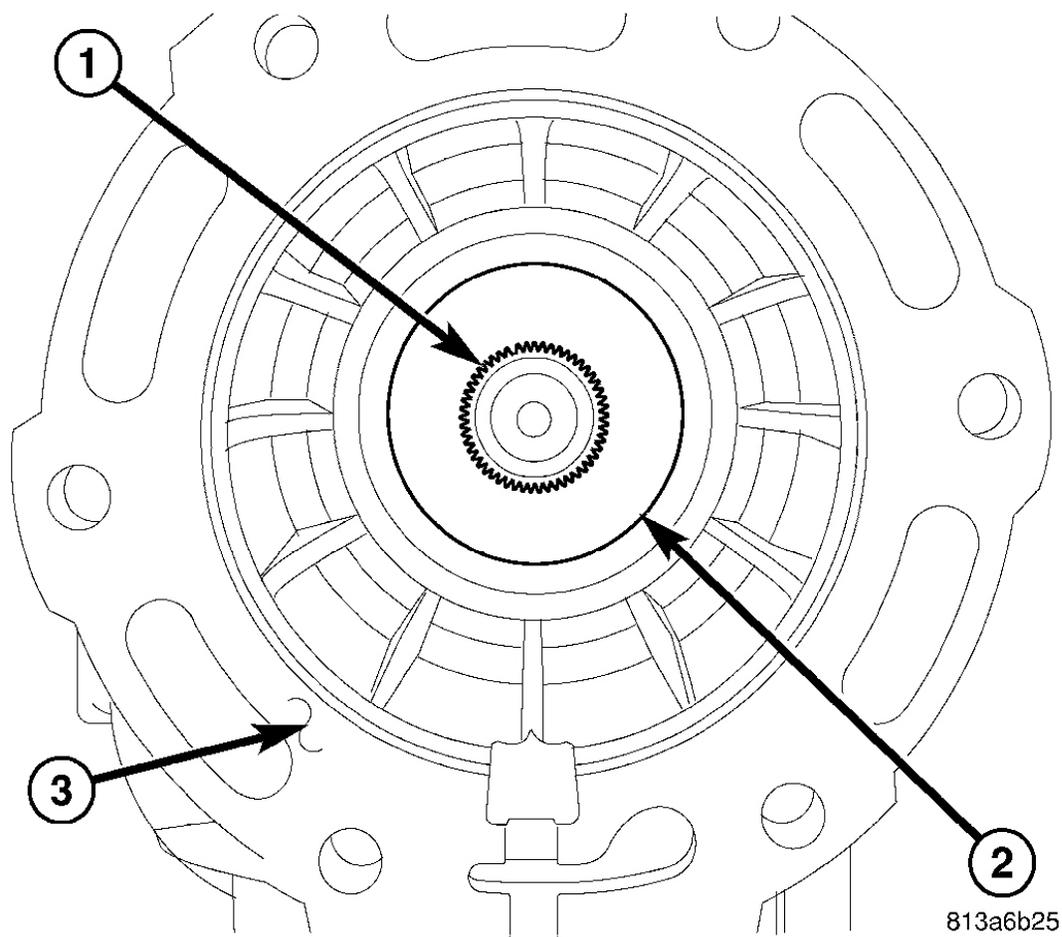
Identifying Output Shaft, Seal & Rear Housing
